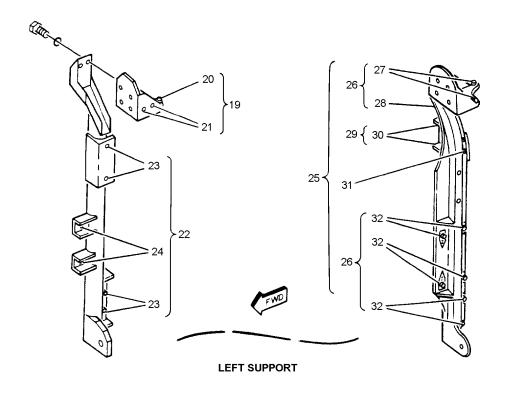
Fuel Diverter Valve Supports (Sheet 1)
